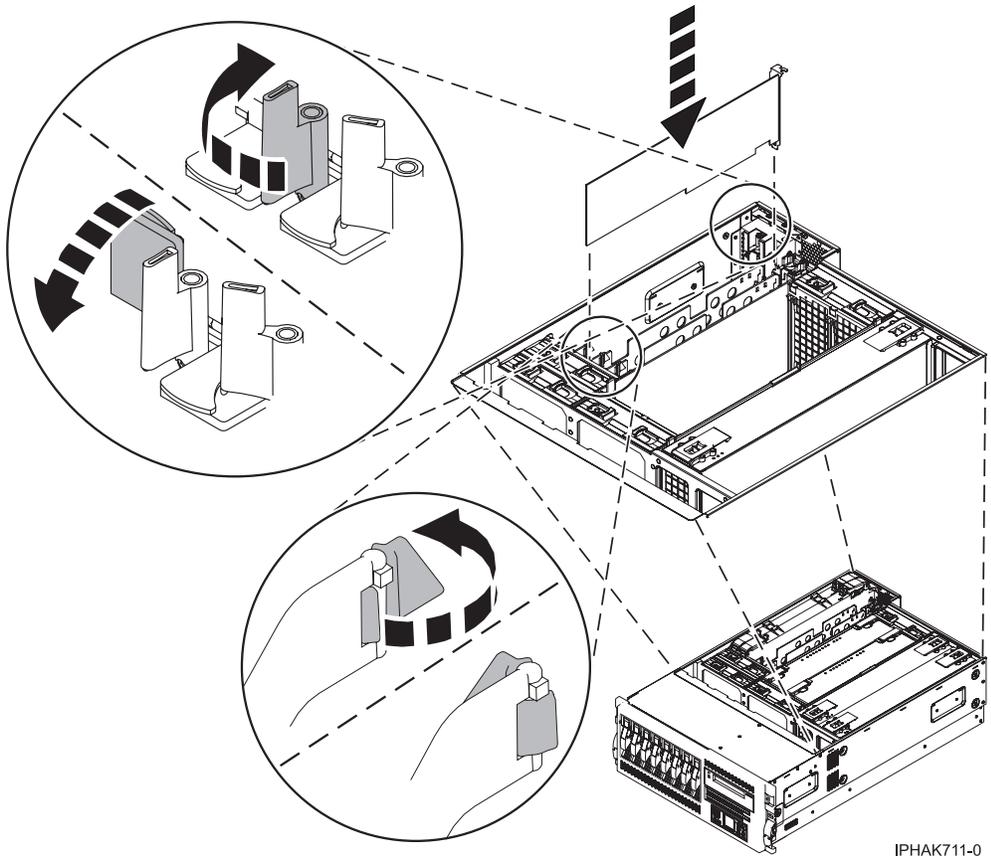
PCI adapter or filler plate removed from the rack-mounted unit
